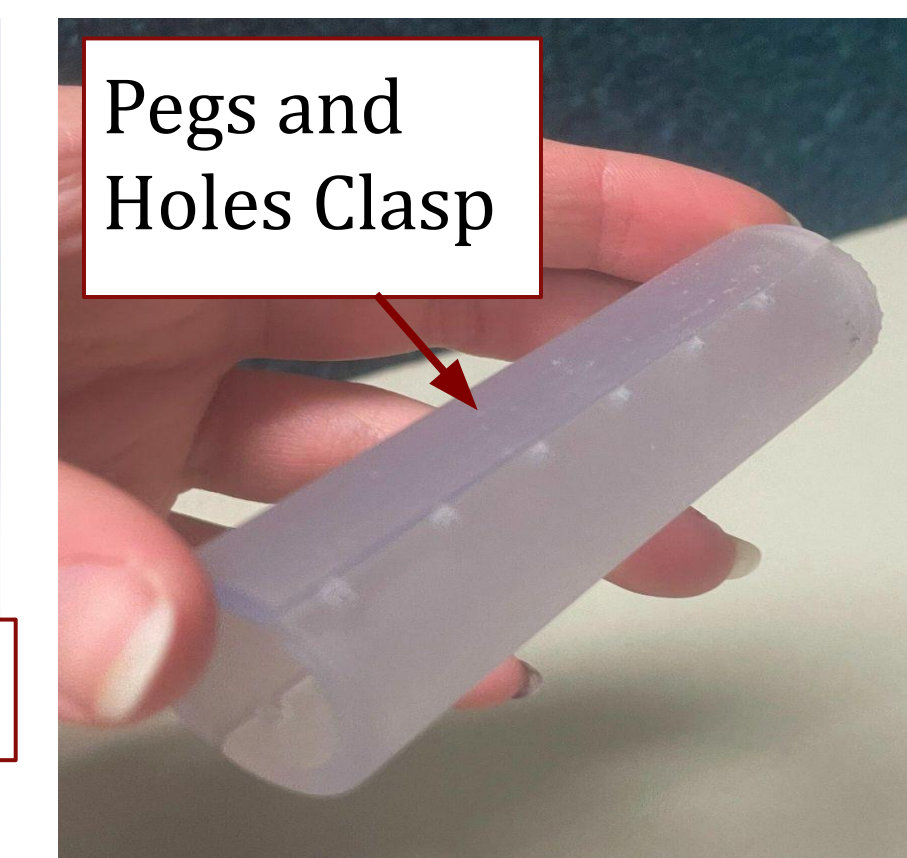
Final "Lego" design, 3D printed in FormLabs BioMed Clear Resin.
